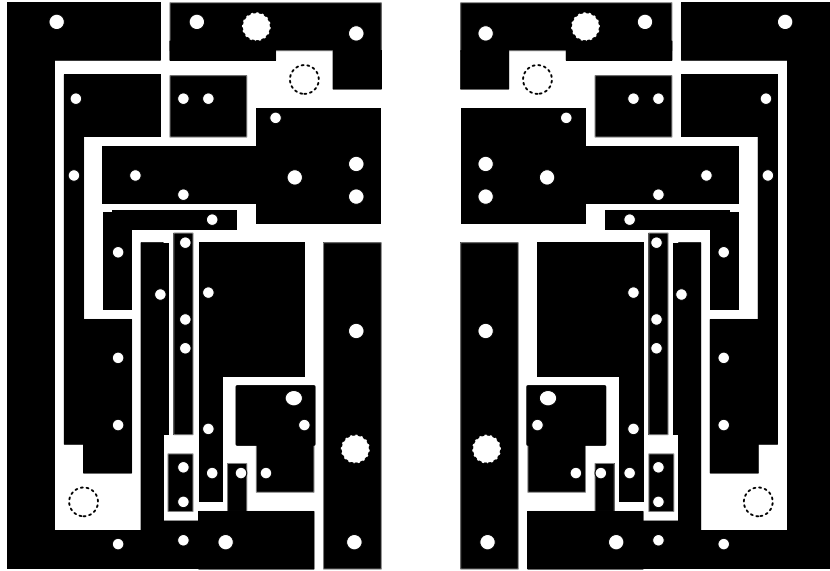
Printed Circuit masks for Techniks Press-N-Peel Transfers
